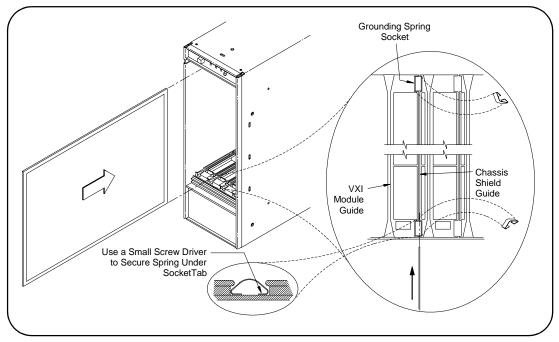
Installing the Grounding Springs and Chassis Shield.
